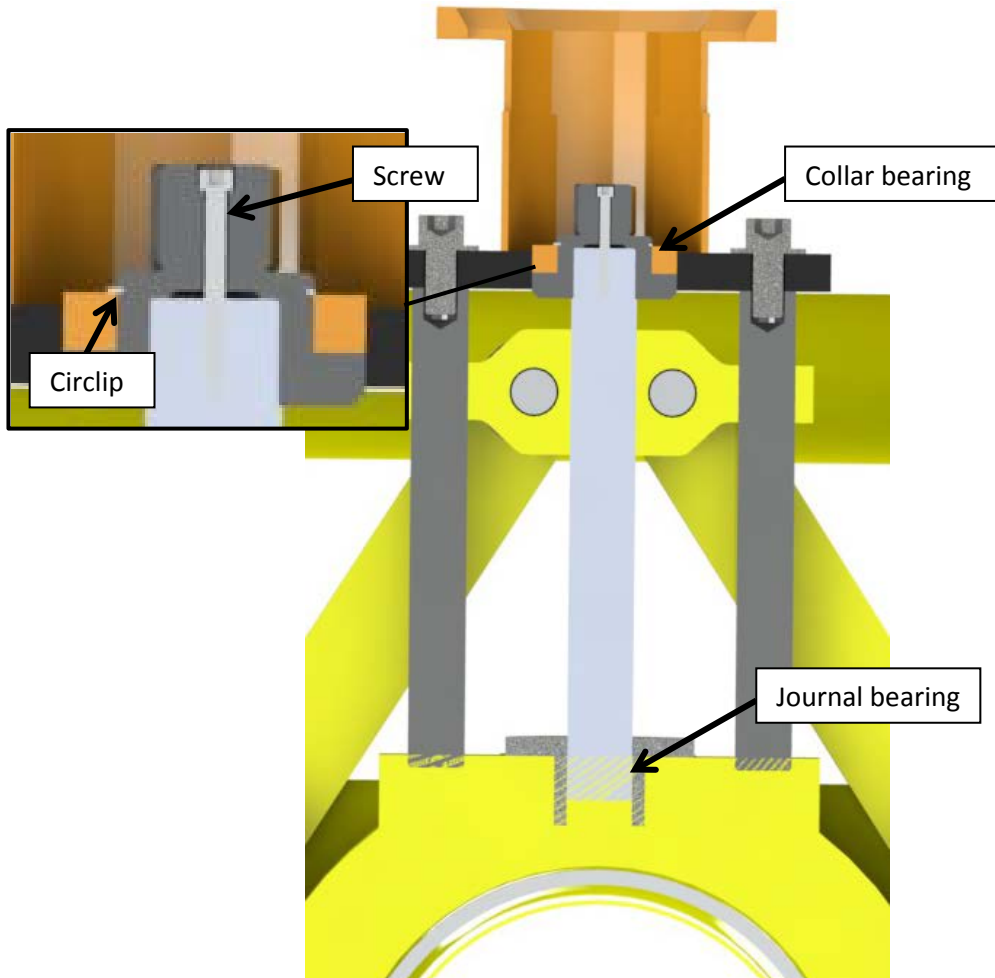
A section view of the locking mechanism in open position. The power screw has a collar bearing at the top and a journal bearing at the bottom.
